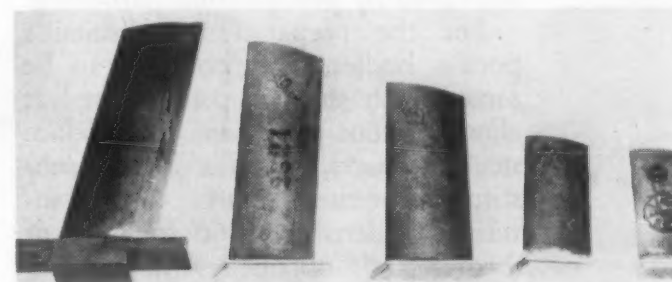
Cold bend test shows ductility of jet engine compressor blade of iron infiltrated with copper.
